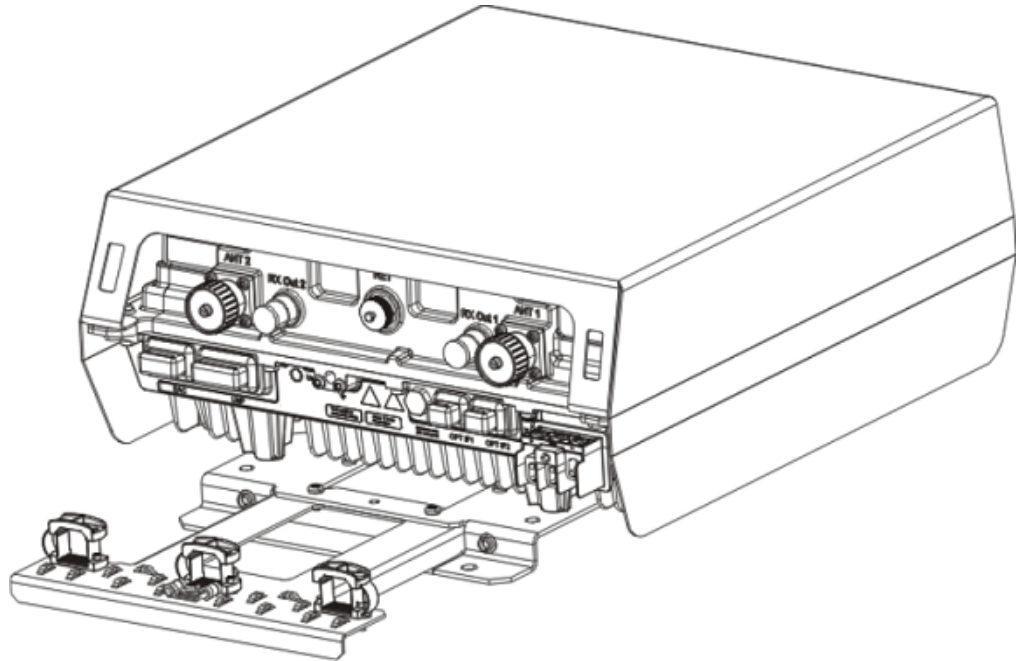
Isometric view of the Remote Radio Head (FHCA)
